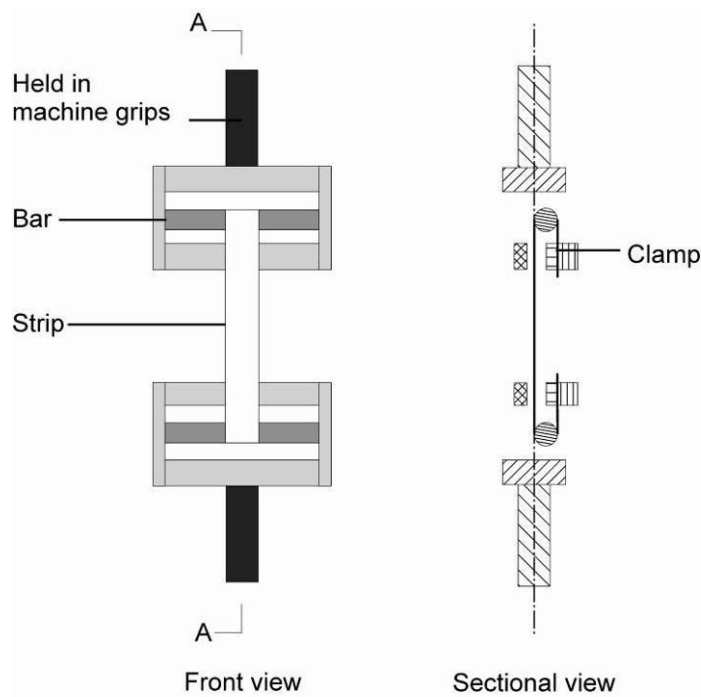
Custom-designed grips used for tensile testing of NiTi strip. Front view on the left and sectional view on the right
